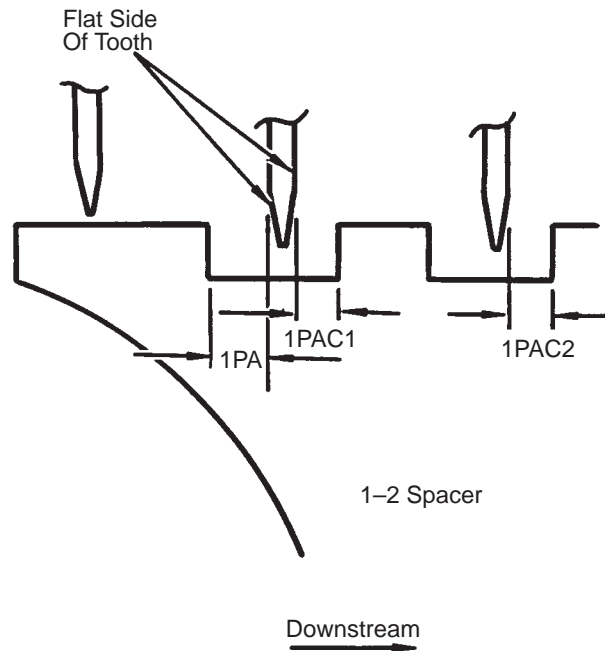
Axial Clearances "1PA," "1PAC."
